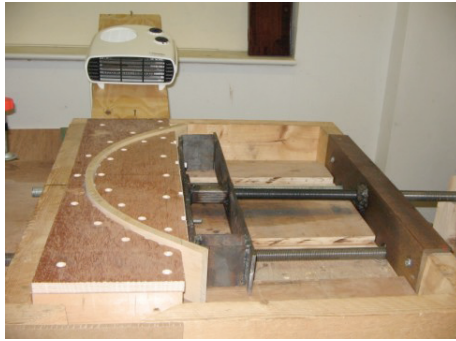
The ash workpiece moments after completion of bending. The drying of the workpiece begins immediately using a fan heater as shown, for 7 days while clamped in the former.
